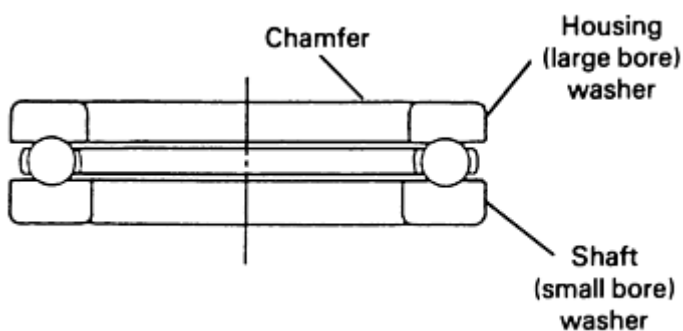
Thrust ball bearing designed to carry axial load only due to 90° contact angle
